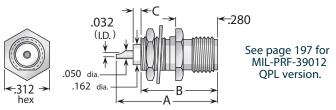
(Front mount, solder pot contact, no mounting gasket)
